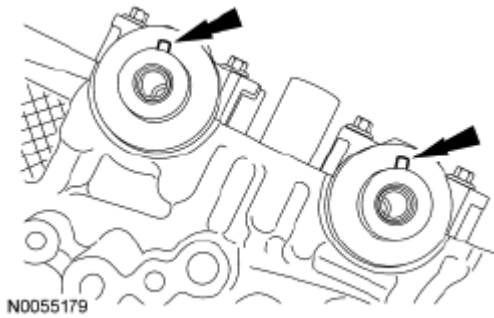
Positioning Camshafts Onto LH Cylinder Head In Neutral Position
